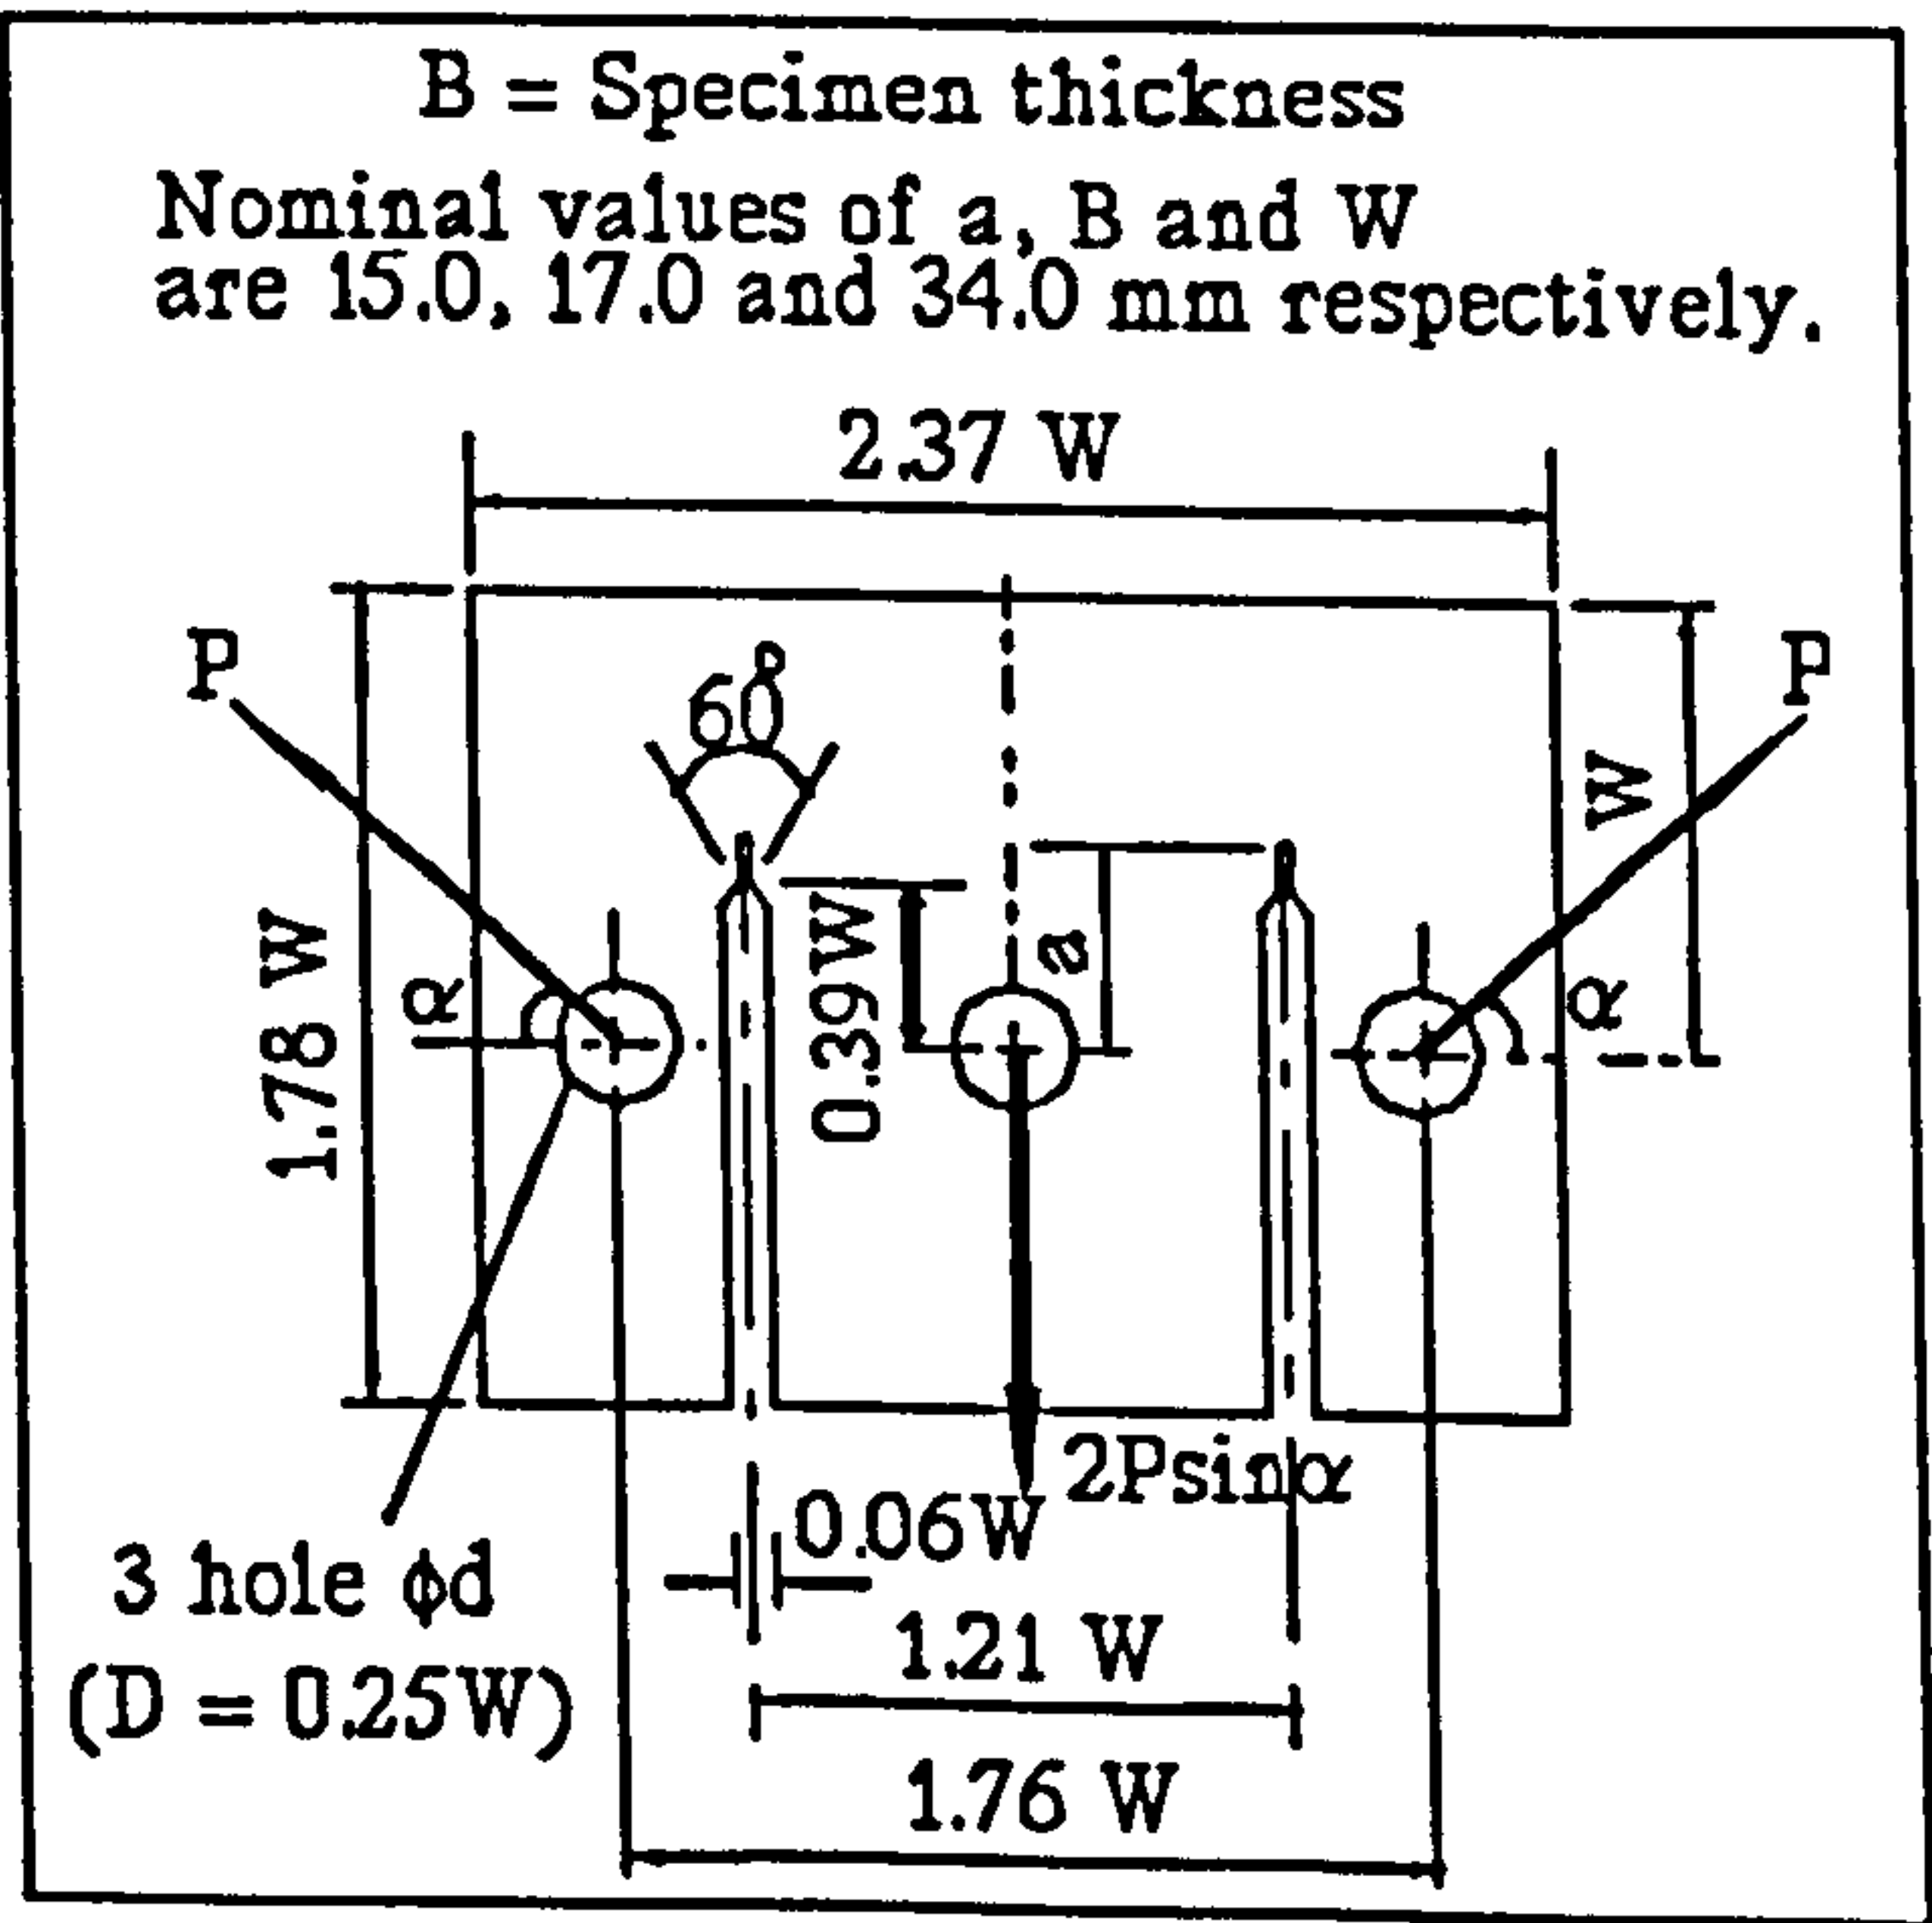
The CMM specimen with two notches. At fracture  $P = P_C$ .
